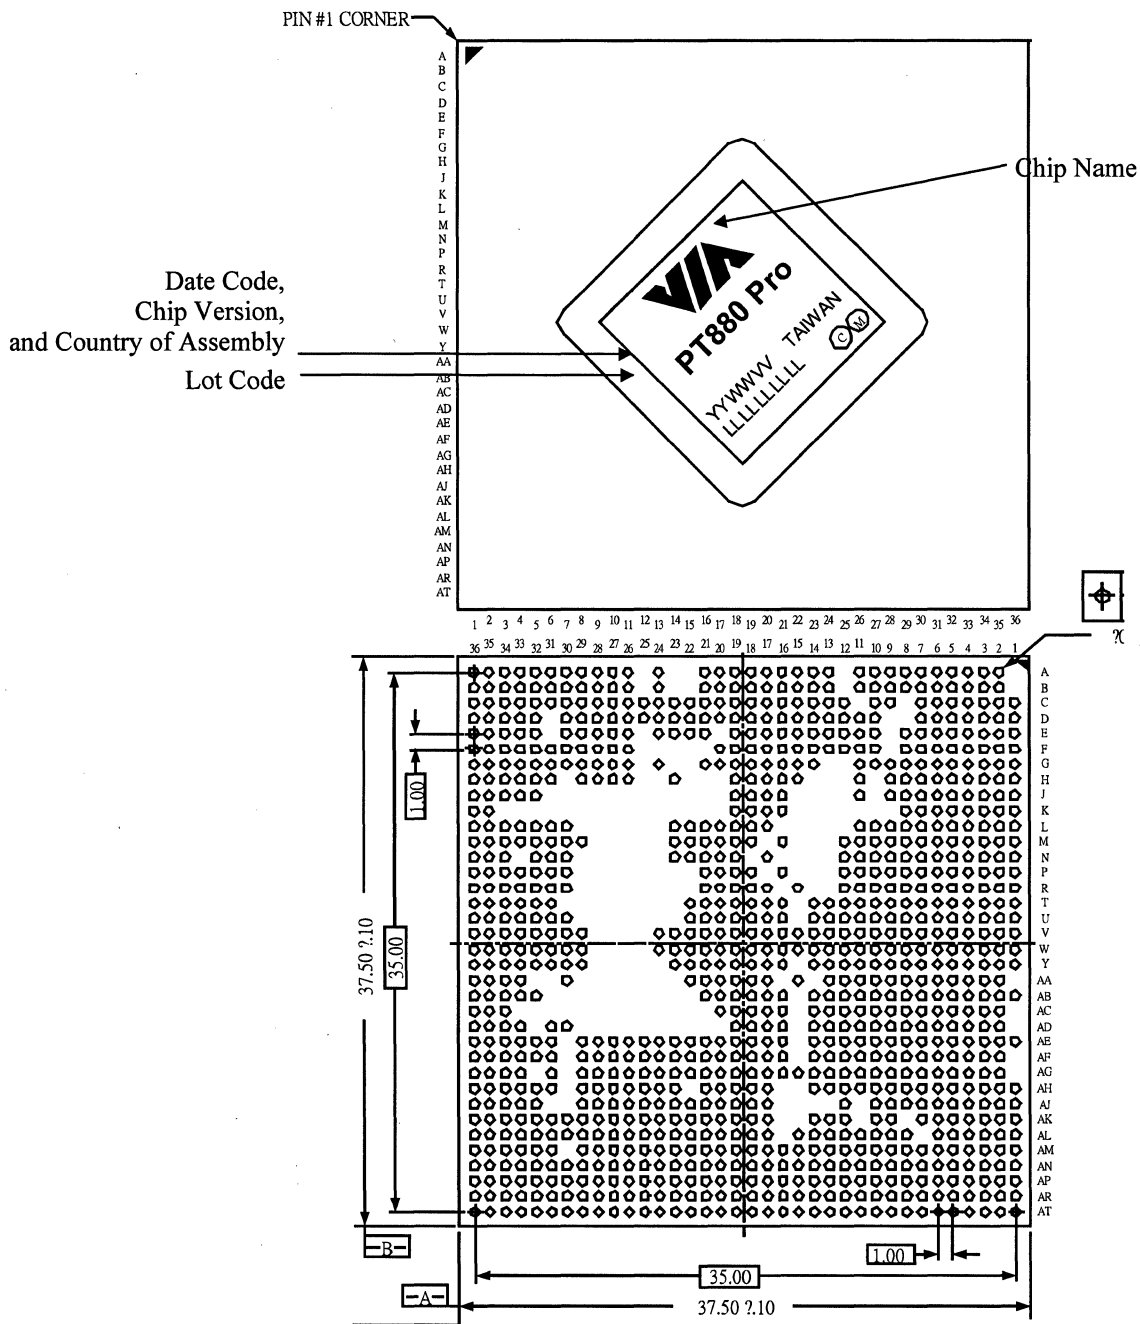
Mechanical Specifications – FCBGA-1054 Flip Chip Ball Grid Array Package
